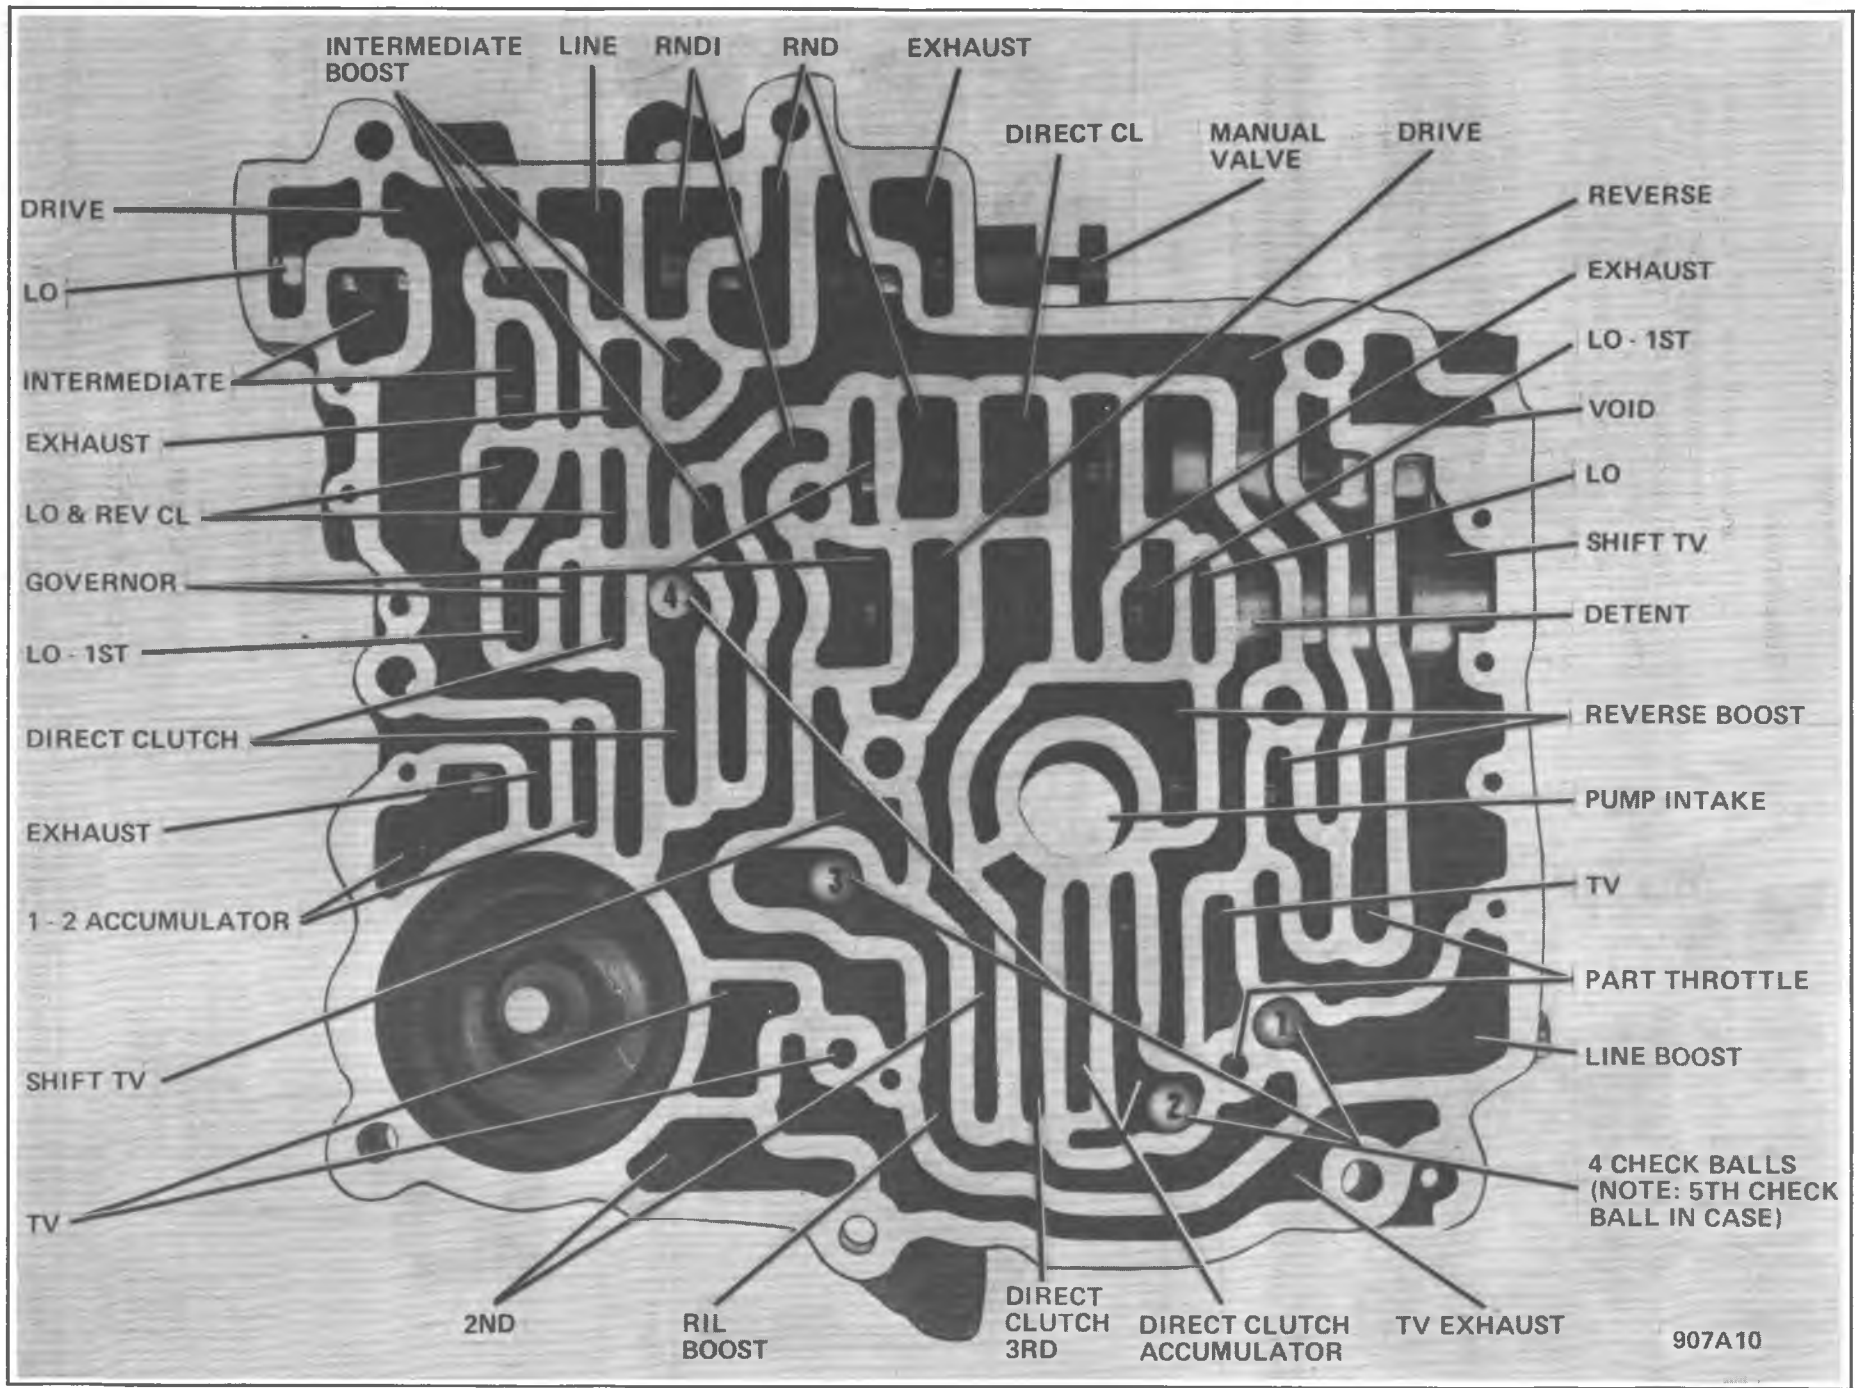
A1-189 Control Valve Assembly with Four Check Ball Locations
